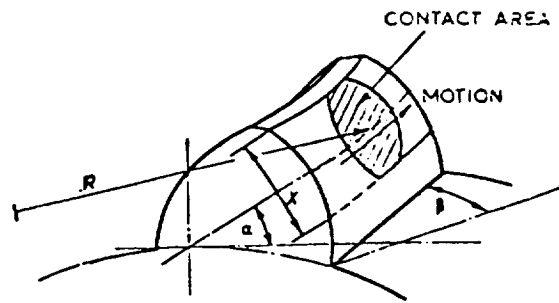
(b) Surface-Loading analysis of W/N gears
